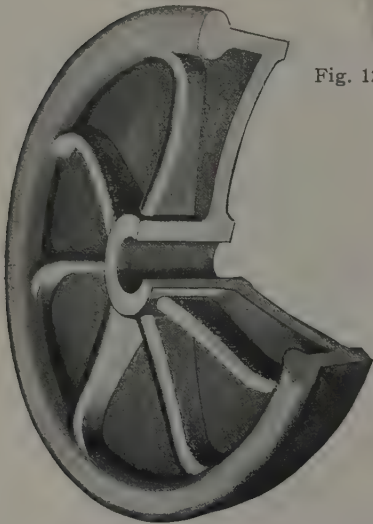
Single Plate Chilled Cast Iron Wheel. Lobdell Car Wheel Company.
